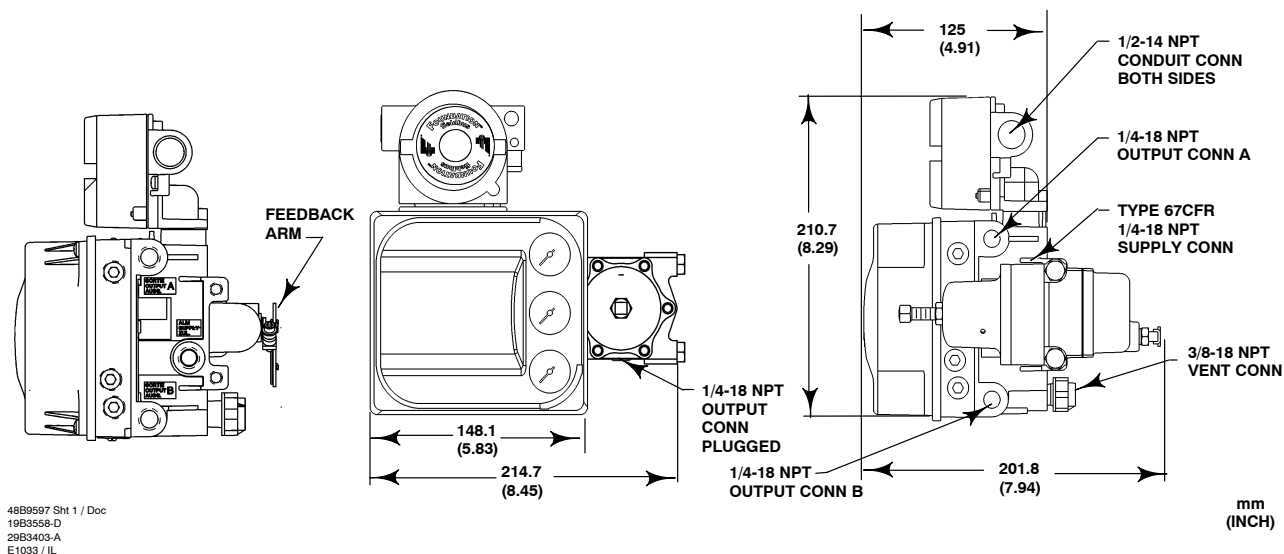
Dimensions for Type DVC6030f Digital Valve Controller with Integrally Mounted Filter Regulator
